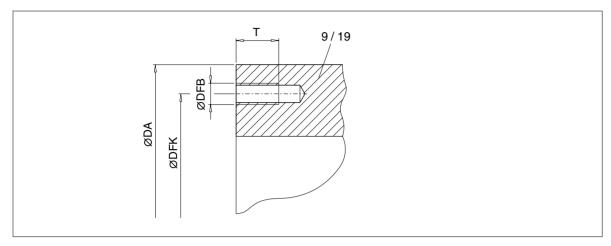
Connection sizes for flanges, brake disks etc. with coupling ring (9 / 19)
